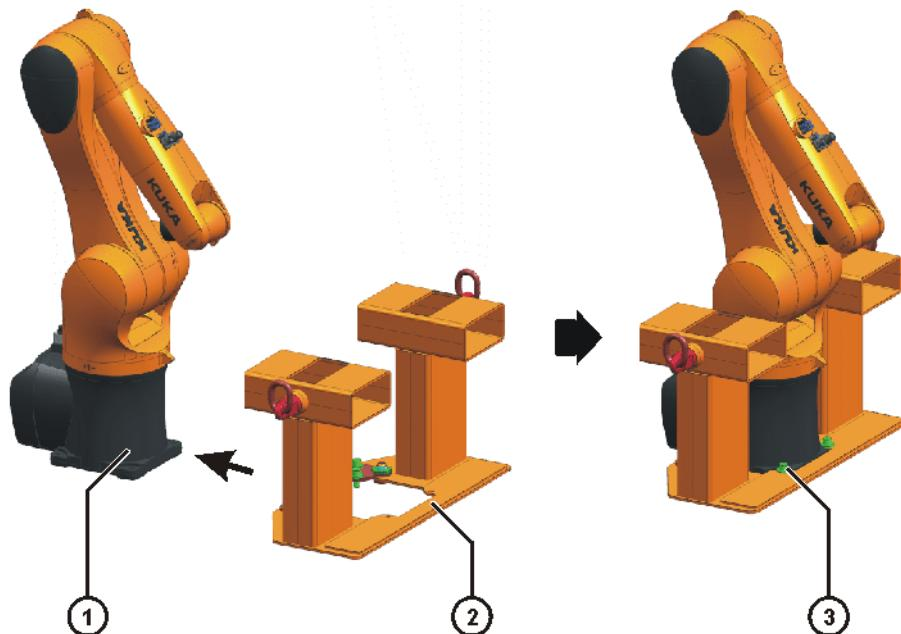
Pushing on the Load Lifting Attachment and fastening it at the front
